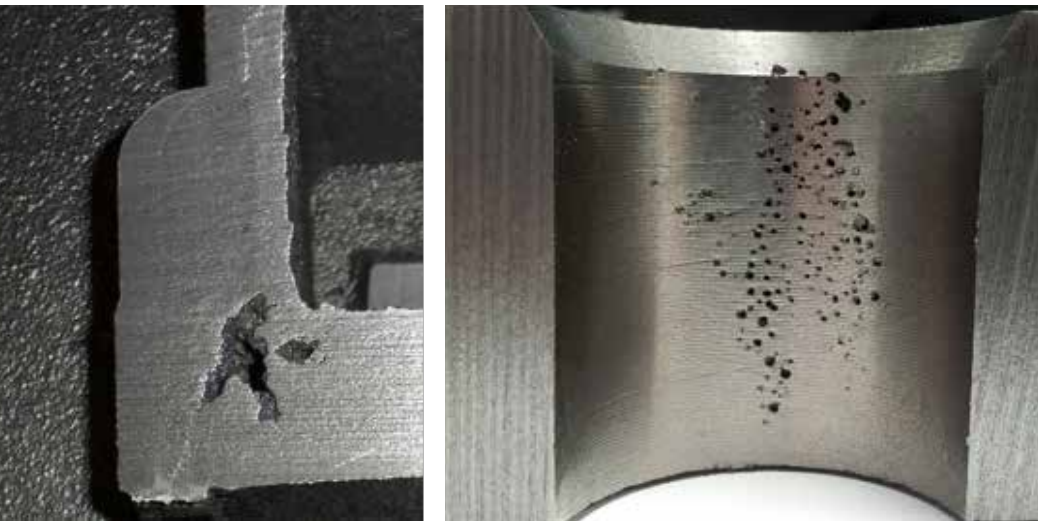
Shows two different ductile iron castings molded in sand with defects discovered after machining by an transportation sector OEM. The automotive OEM wondered, "What if I am buying more defective castings, that I'm not even aware of...?"
